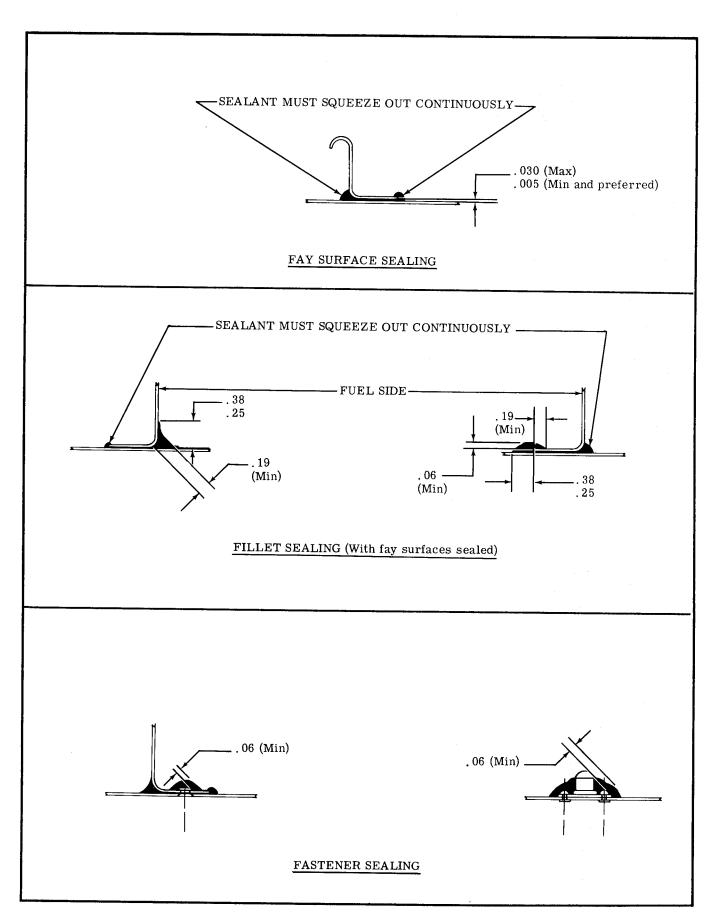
Fuel Bay Sealing (Sheet 2 of 2)
